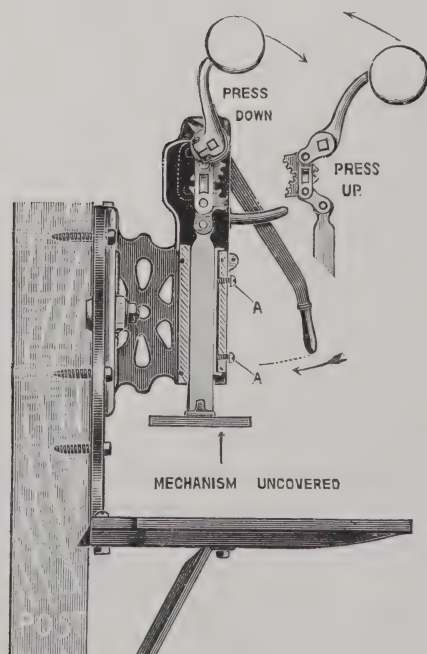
THE "ECONOMIC" BENCH MOULD, SECTIONAL VIEW
